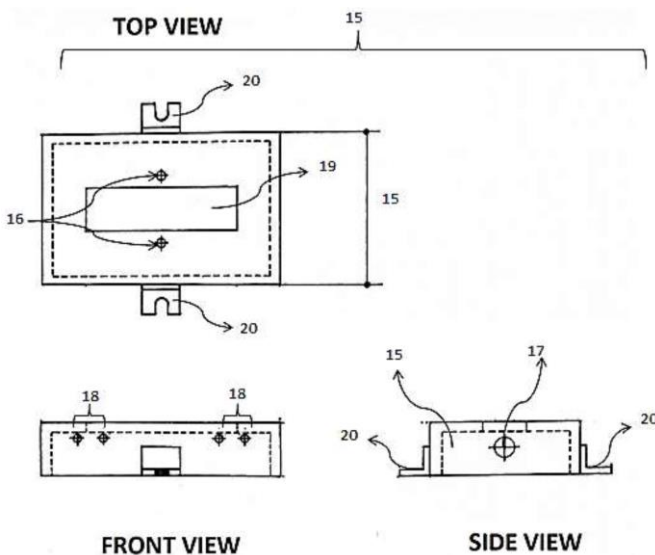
is a detailed top view, front view and side view of the frame of the present invention.
